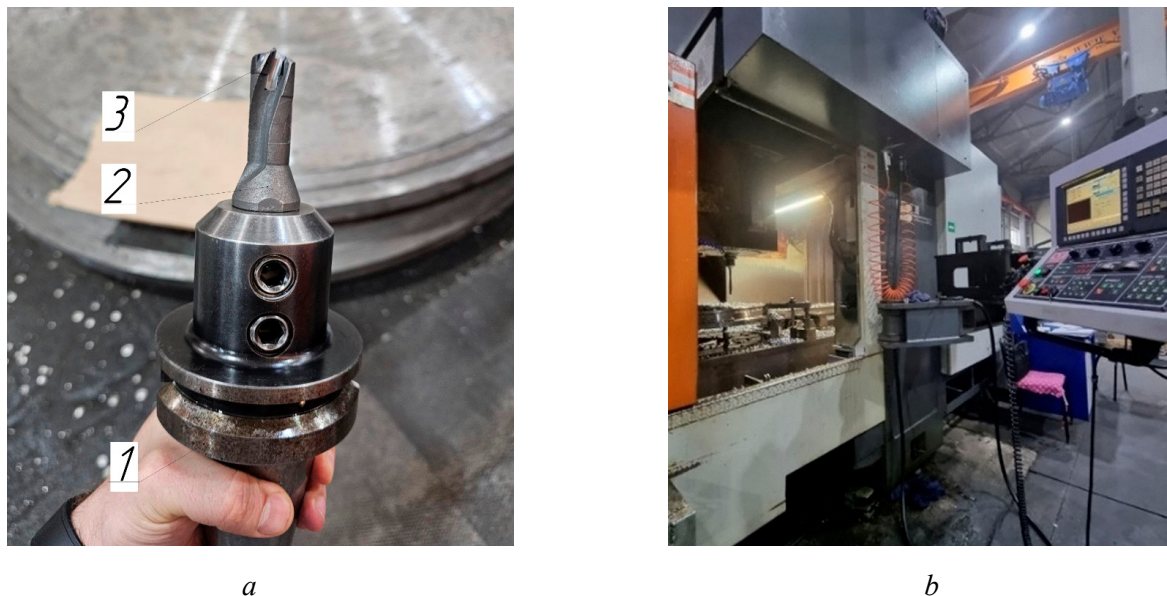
Experimental setup and tool clamping during tool-life tests:
